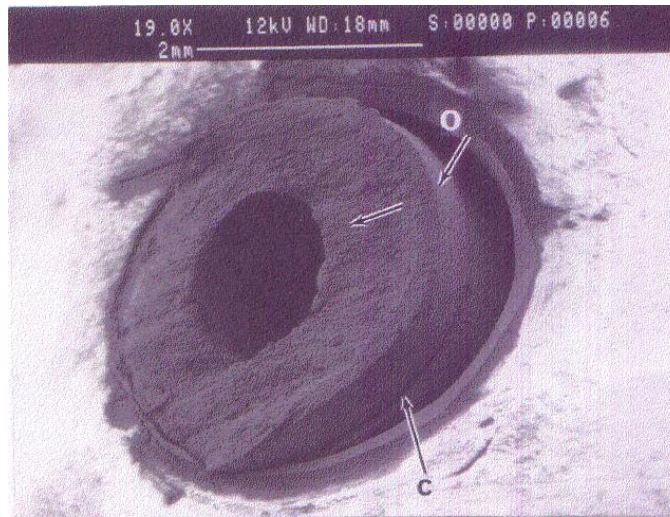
Non-fracture plane circumferential crack, bellcrank #5.
